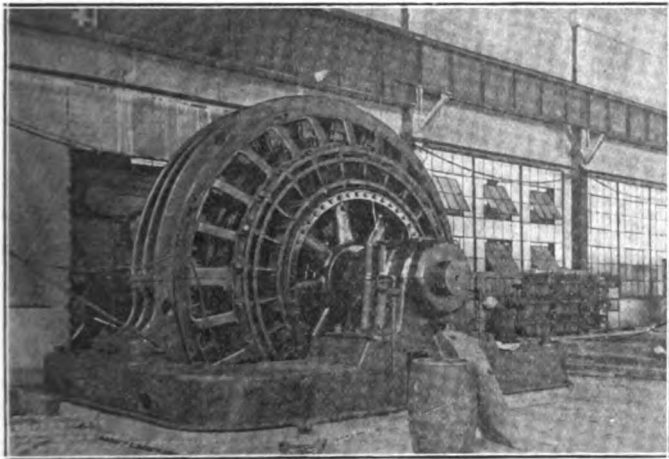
Reversing motor unit—30-inch universal plate mill Mark Manufacturing Company.
